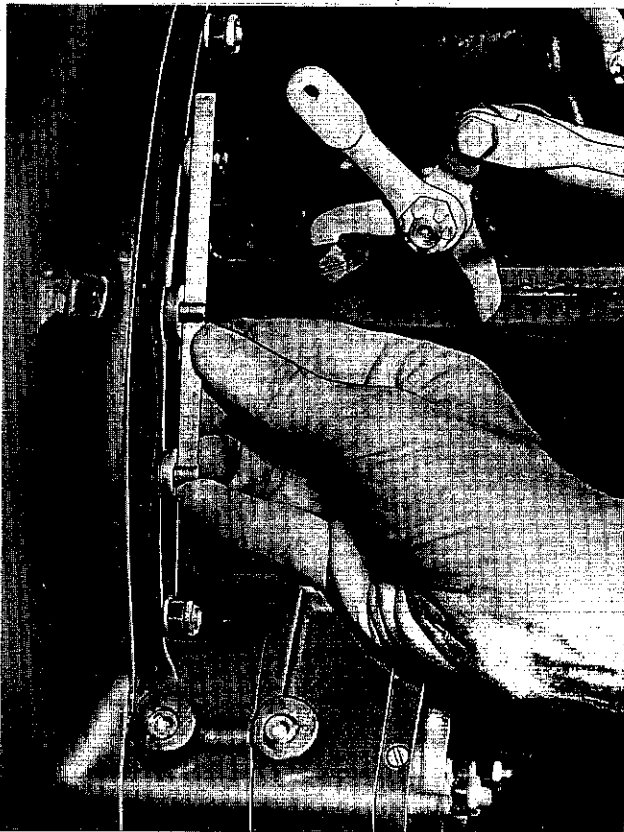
Checking Level of Spacer Washers on Type I Installation.
